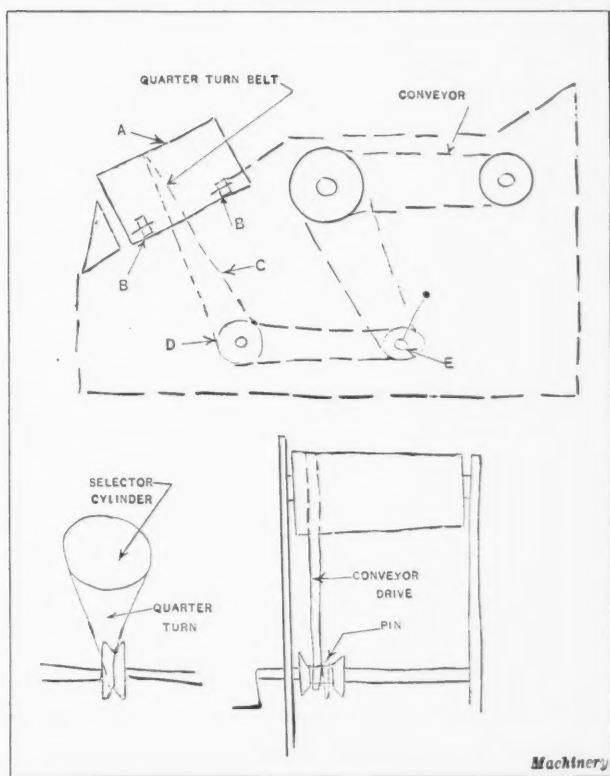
Rough Sketch showing Details of Drive for Conveyor
